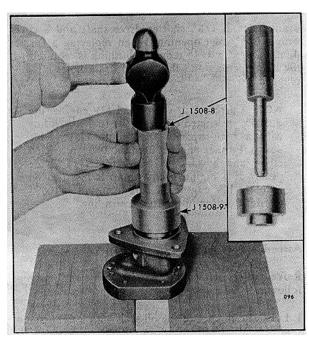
Installing Outer Oil Seal using Tools J 1508-8 and J 1508-9
